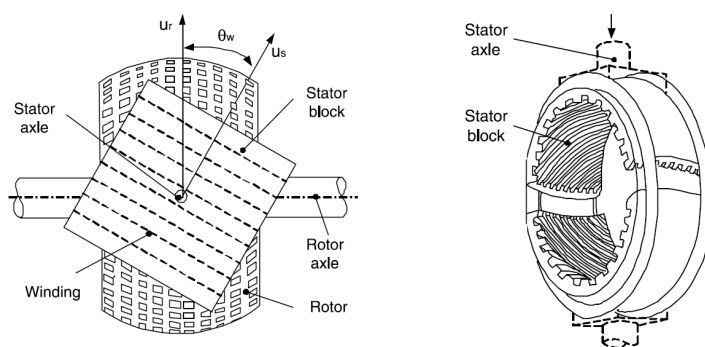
A 2-DOF spherical induction motor proposed by Williams et al. [32]. (Left) Rotor and stator block. (Right) Structure of the stator. Drawing taken from [24].
